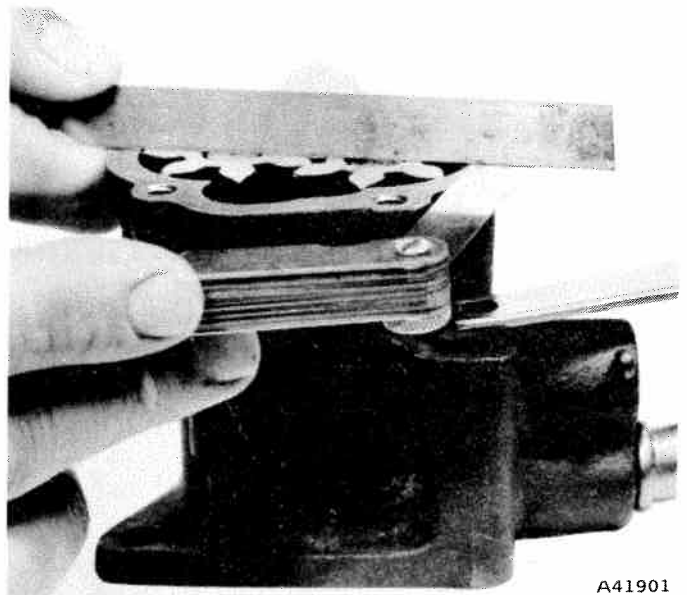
A-32 Oil Pump Gear End Clearance Measurement
